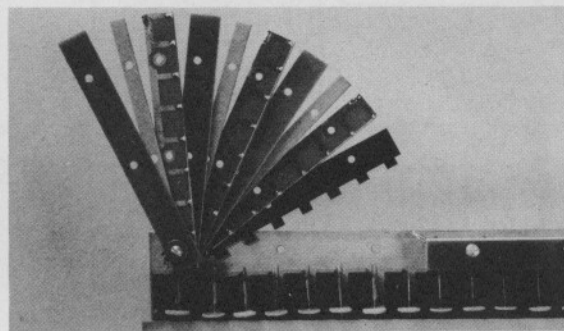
One end of a key-switch assembly, showing the switch blocks, printed-circuit output busses, and separators.
